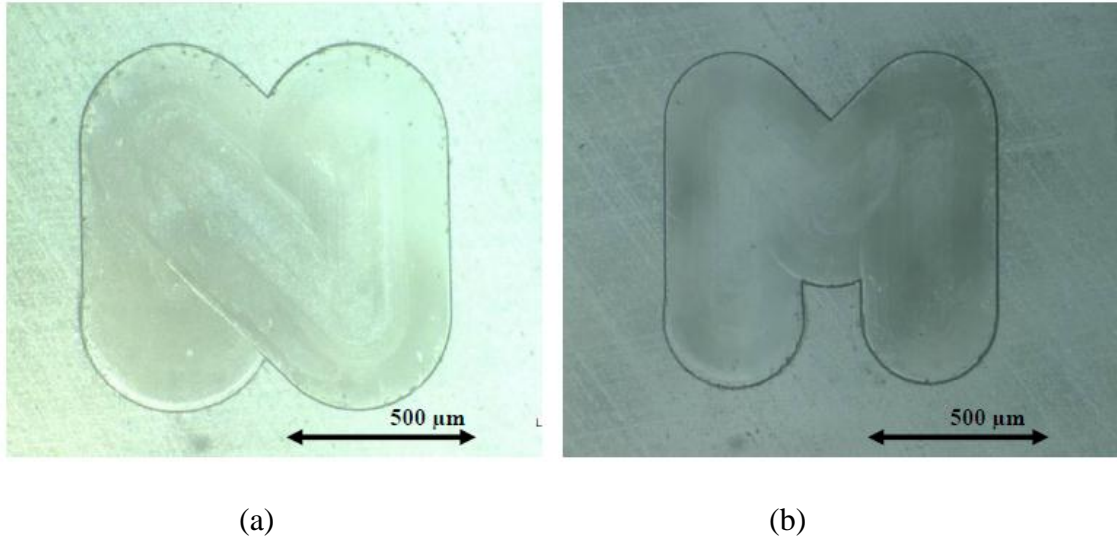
12: Fabrication of “N” and “M” slots on BK7 glass using micro-grinding process with on-machine fabricated PCD tool
